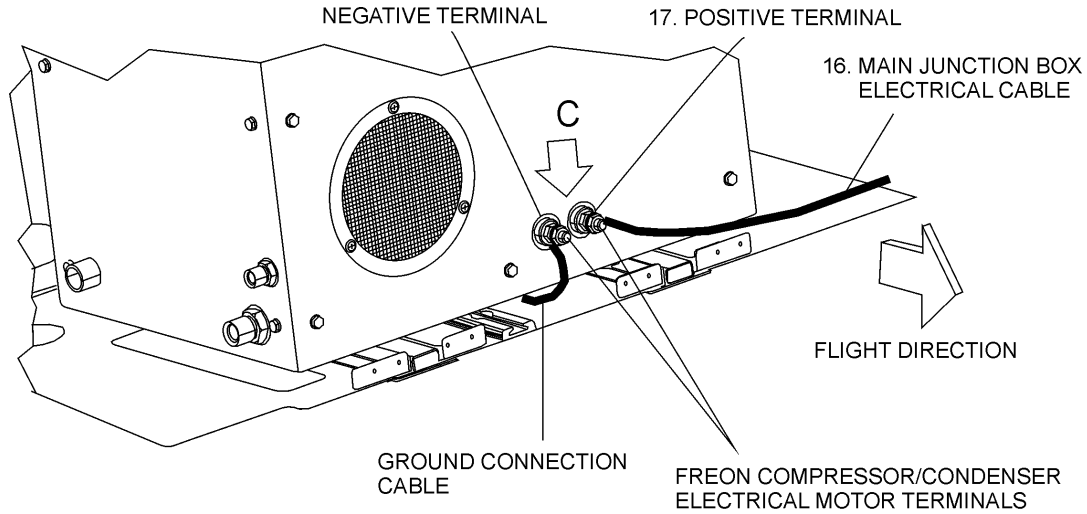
Compressor/Condenser - Removal/Installation (Sheet 5 of 6)
